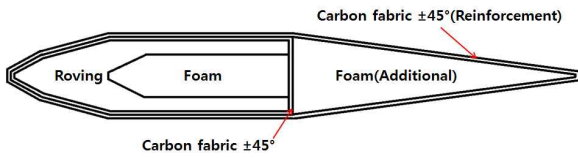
BO-105 Blade 830mm Section Reinforcement Modeling
